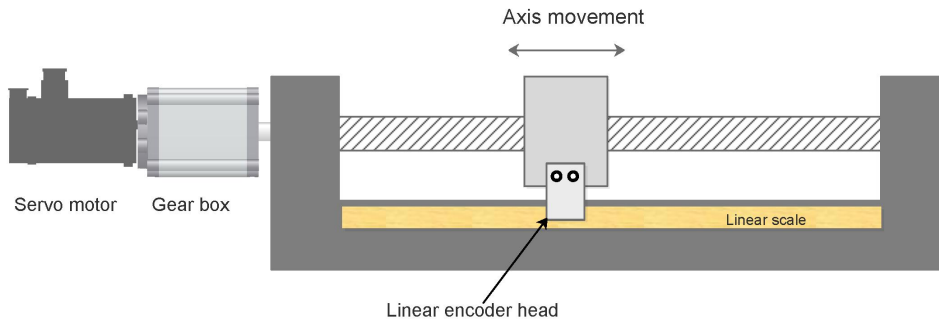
Load rotating motor (with gear box and ball screw) and linear encoder
